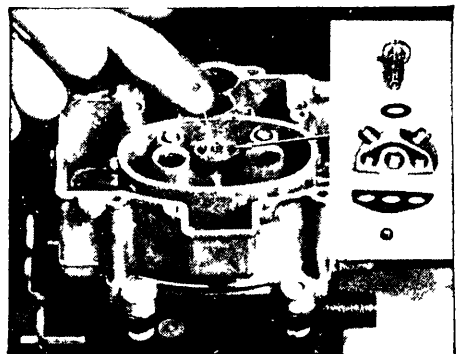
Assemble pump outlet ball check valve, nozzle gasket, nozzle, gasket and nozzle screw
